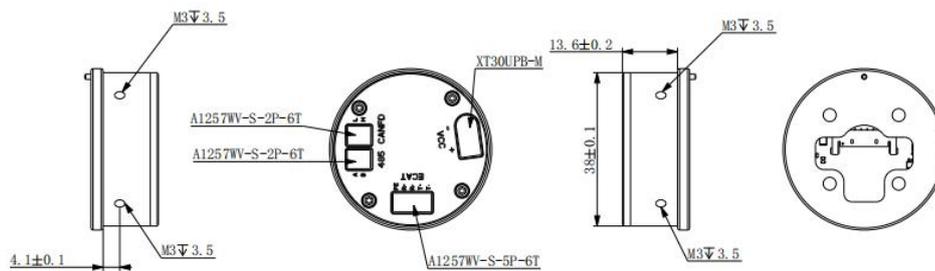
Revo 2 Pro & Touch Wrist Mechanical Interface Dimensions
